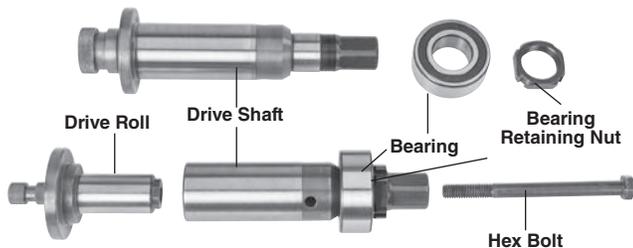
One Piece Drive Shaft (Top), Two Piece Drive Shaft (Bottom)
